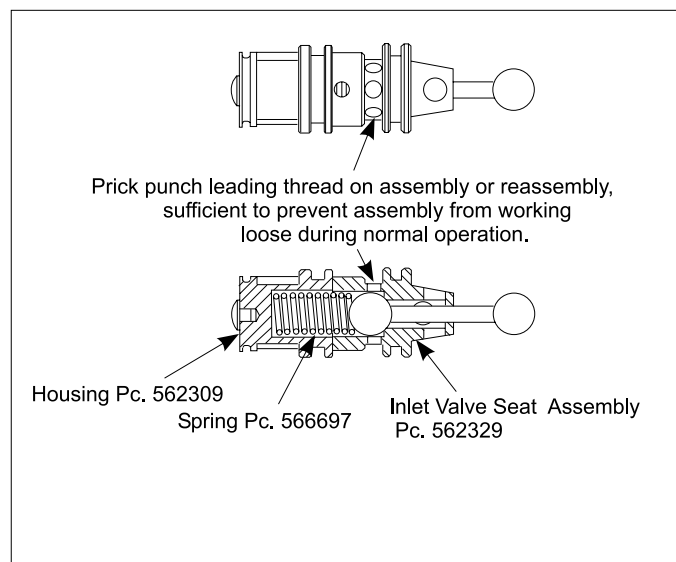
Inlet and Exhaust Valve Unit - ASSEMBLY
